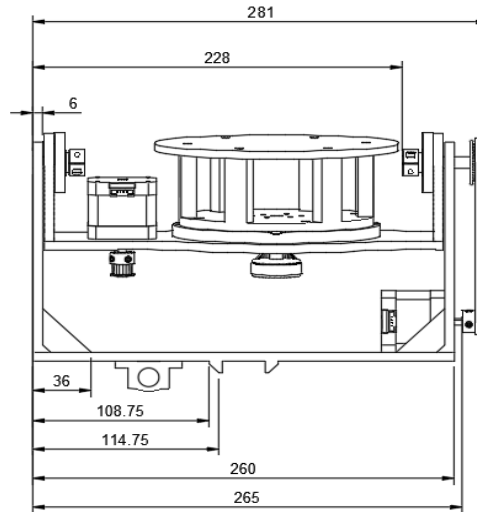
Multi Axis Print Assembly 2 Dimensions
